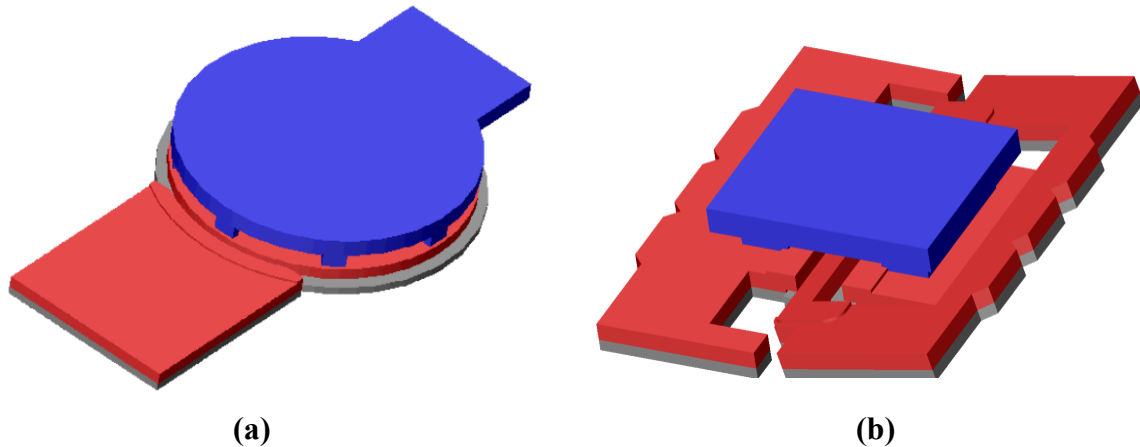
One-DOF joints: (a) pin joints and (b) hinge joints.
